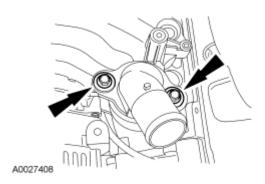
Coolant Outlet Adapter & Bolts Courtesy of FORD MOTOR CO.
